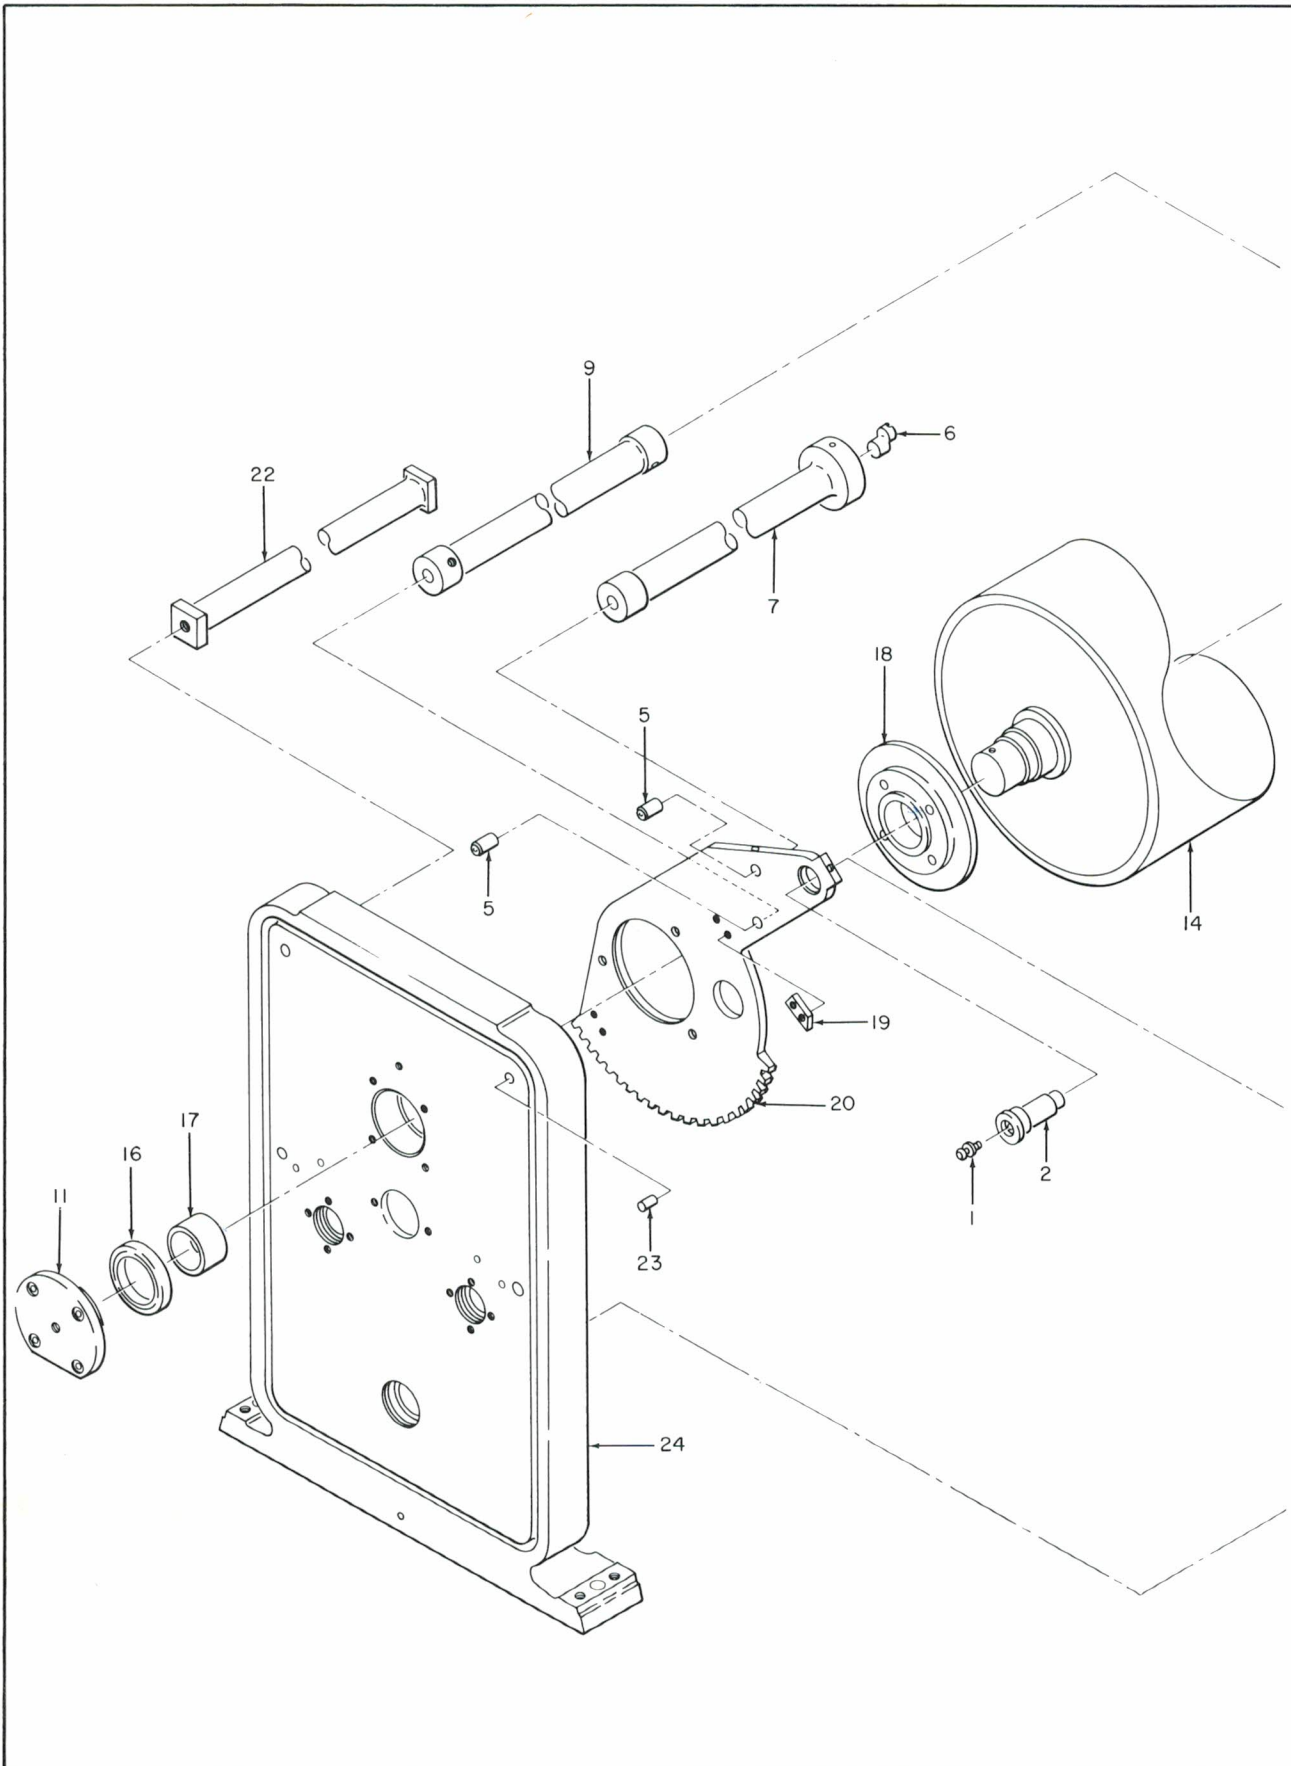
Frames, Braces, Drum and Wrap Rolls Assembly (Sheet 1 of 2)
